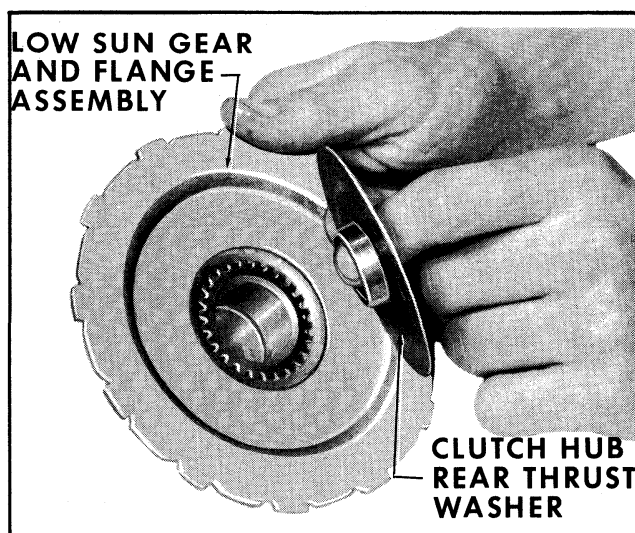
B-84 Installing Clutch Hub Rear Thrust Washer
